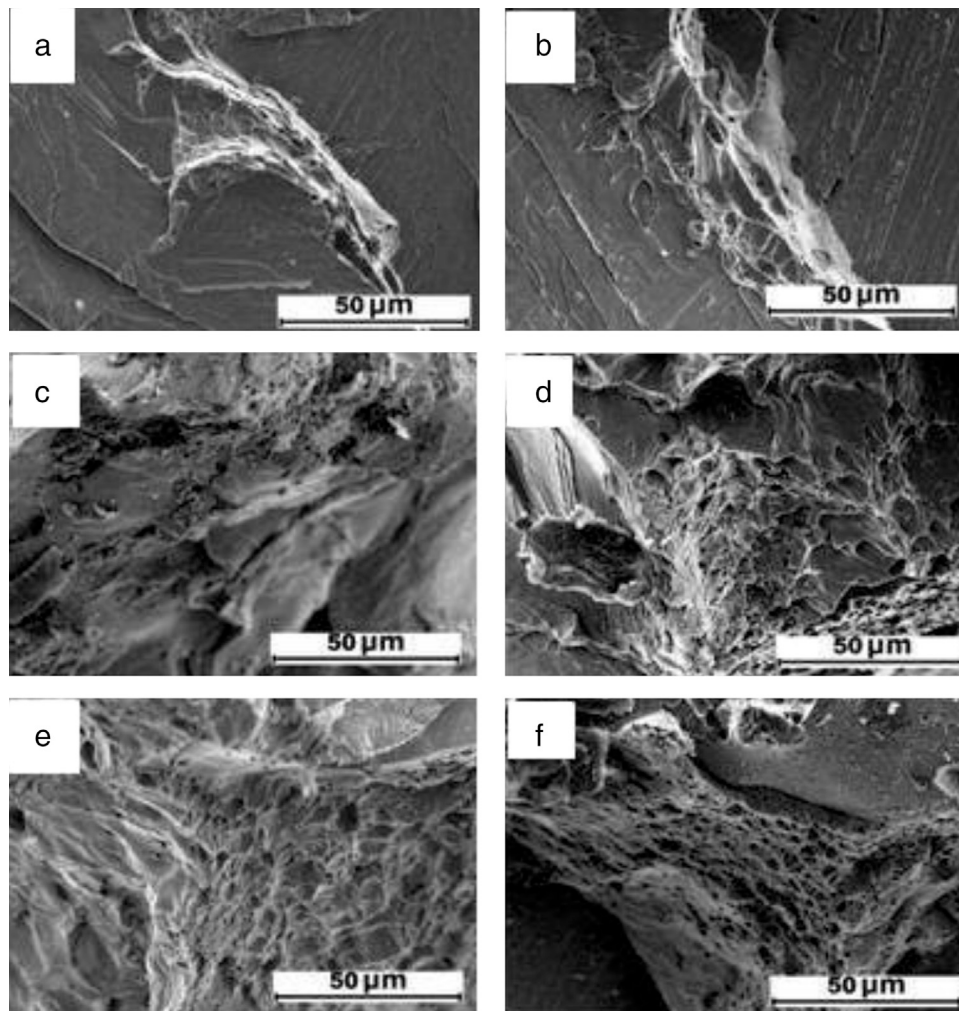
Fractographs of tensile (a–c) and impact specimens (d–f) of ferritic stainless steel weldments in as-welded condition. (a) 1 g Cu (0.1 wt.%) addition; (b) 2 g Cu (0.18 wt.%) addition; (c) 3 g Cu (0.25 wt.%) addition; (d) 1 g Cu (0.1 wt.%) addition; (e) 2 g Cu (0.18 wt.%) addition; and (f) 3 g Cu (0.25 wt.%) addition.
